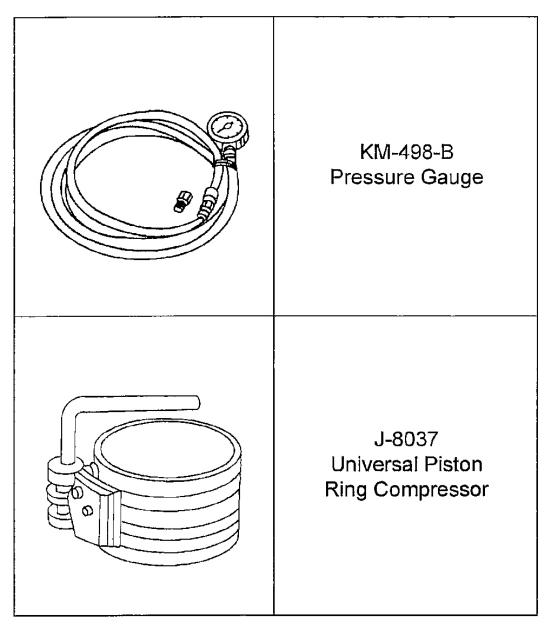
Identifying Special Tools (3 Of 4) Courtesy of SUZUKI OF AMERICA CORP.
